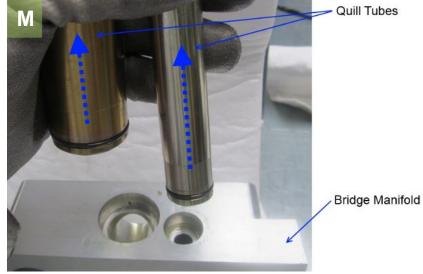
Disassemble Bridge Manifold and Remove O-rings
